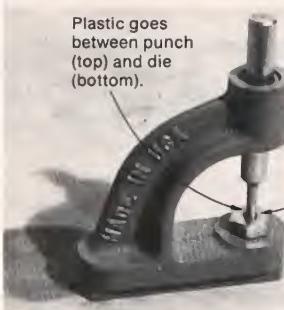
This improvised press for drop-forging rivets was made from an inexpensive tool intended for setting grommets.
